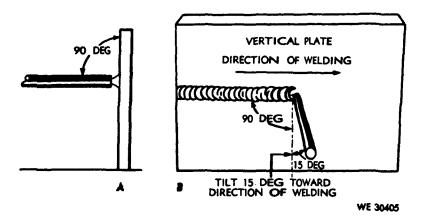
Vertical position welding with bead in horizontal position.
